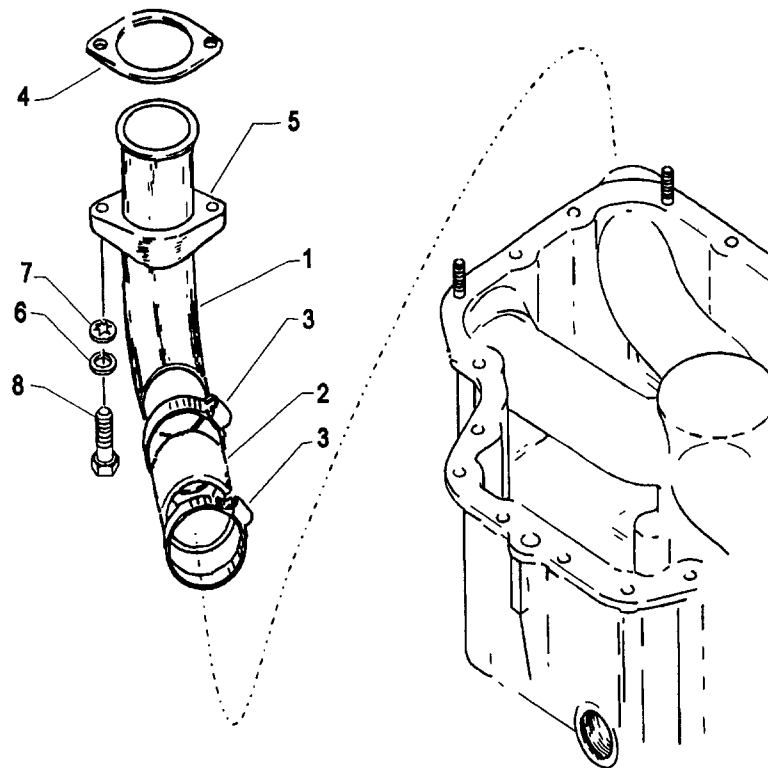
INTAKE PIPES AND ATTACHING PARTS
